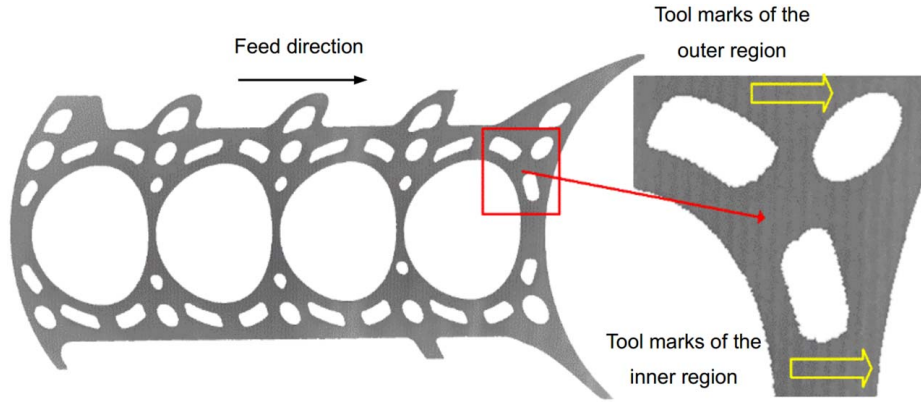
Straightened tool marks on the face milled top surface of an engine block
